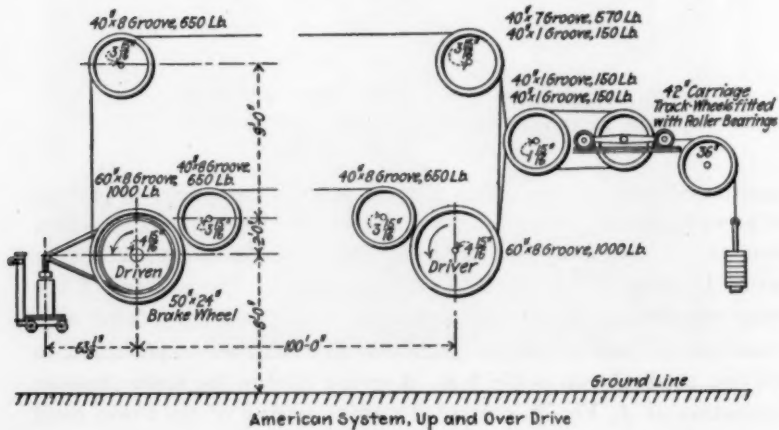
GENERAL PLAN OF AMERICAN "UP AND OVER" DRIVE SYSTEM
